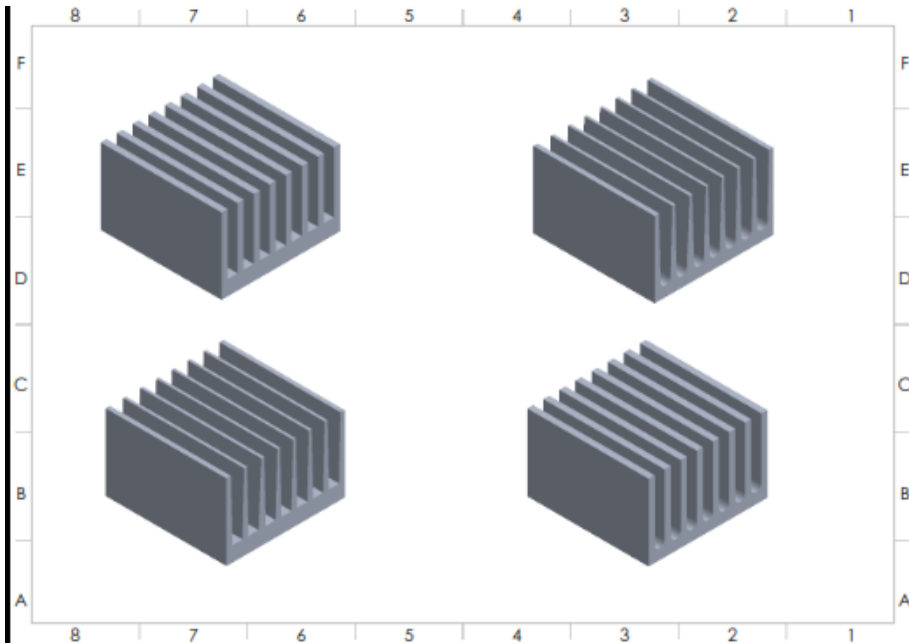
The geometrical model (a) Conventional design and (b) Proposed designs.
